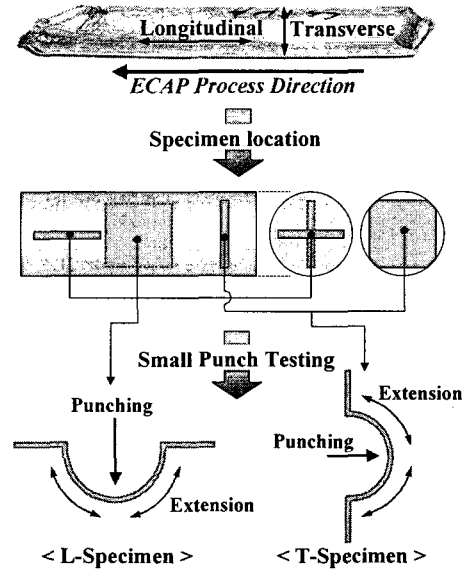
Specimen machining and directions of small punch testing for L- and T-specimens
